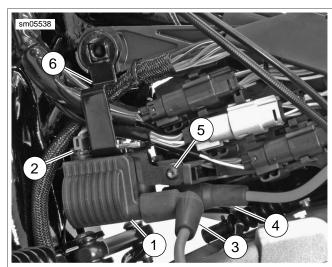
Ignition Coil and Left Wire Harness Caddy: XL Models
